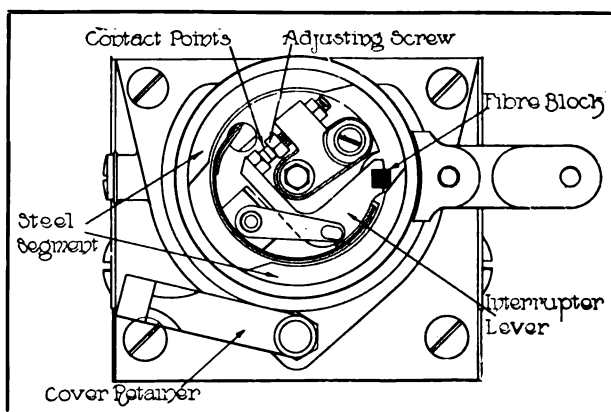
Components of Conventional Type of Circuit Breaker Mechanism.
